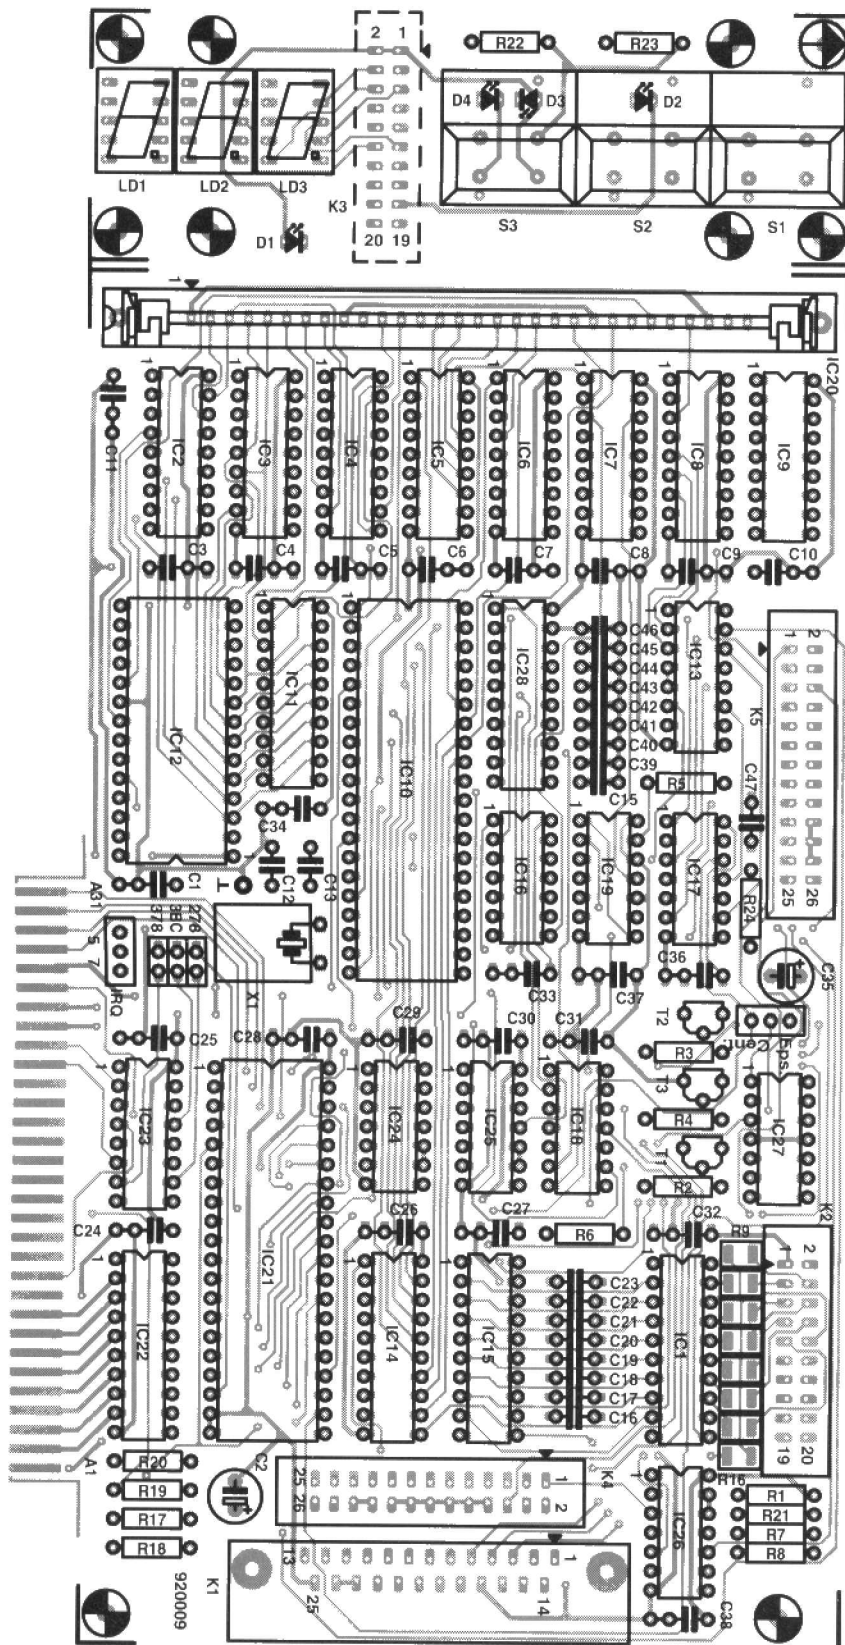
Component mounting plan of the double-sided, through-plated printed circuit board for the printer buffer.
